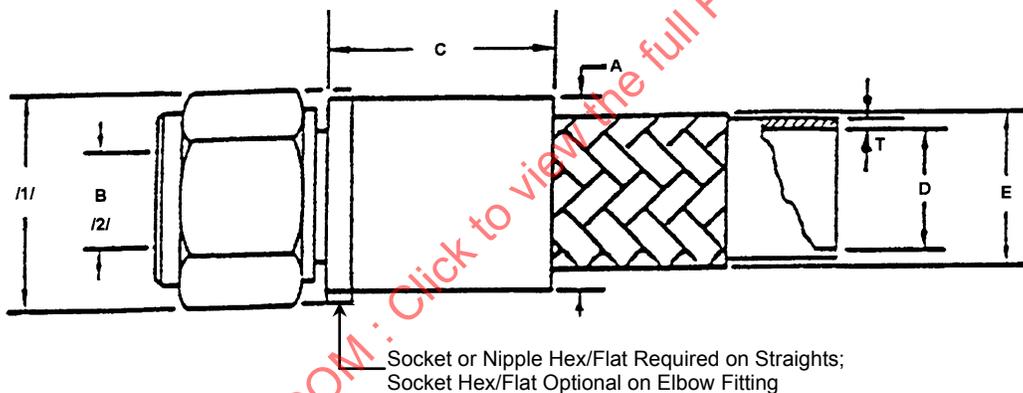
HOSE AND FITTING DIMENSIONS
